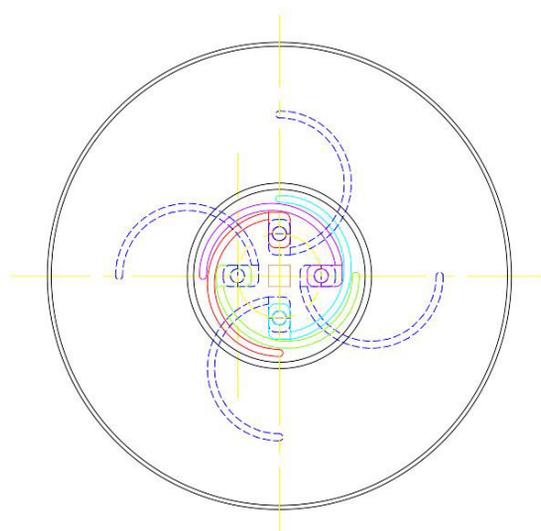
2-dimensional drawing showing how the paddles would nest into one another to be able fit through the beam tube.
